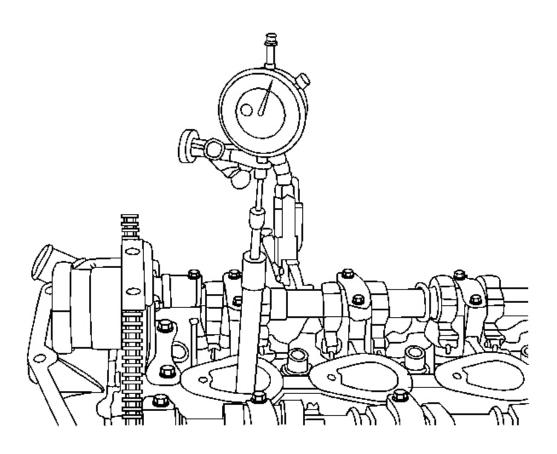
View Of TDC Indicator Tool Courtesy of GENERAL MOTORS CORP.
